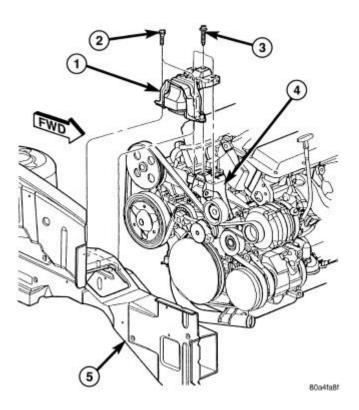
Right Engine Mount Courtesy of CHRYSLER LLC
